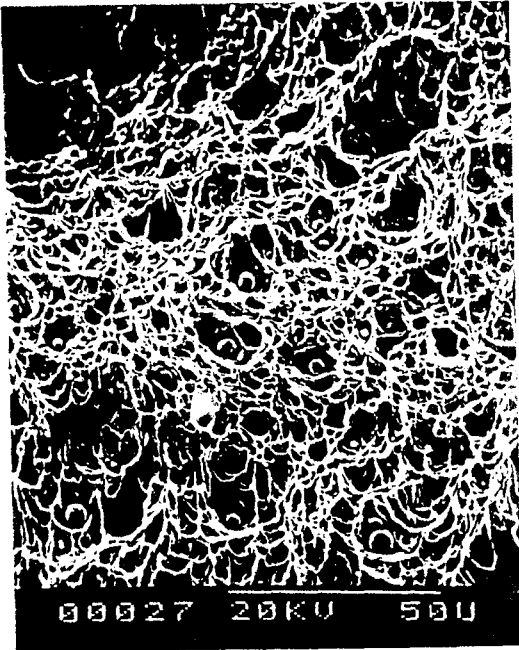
Fracture surfaces of weldment impact specimens at 22°C
